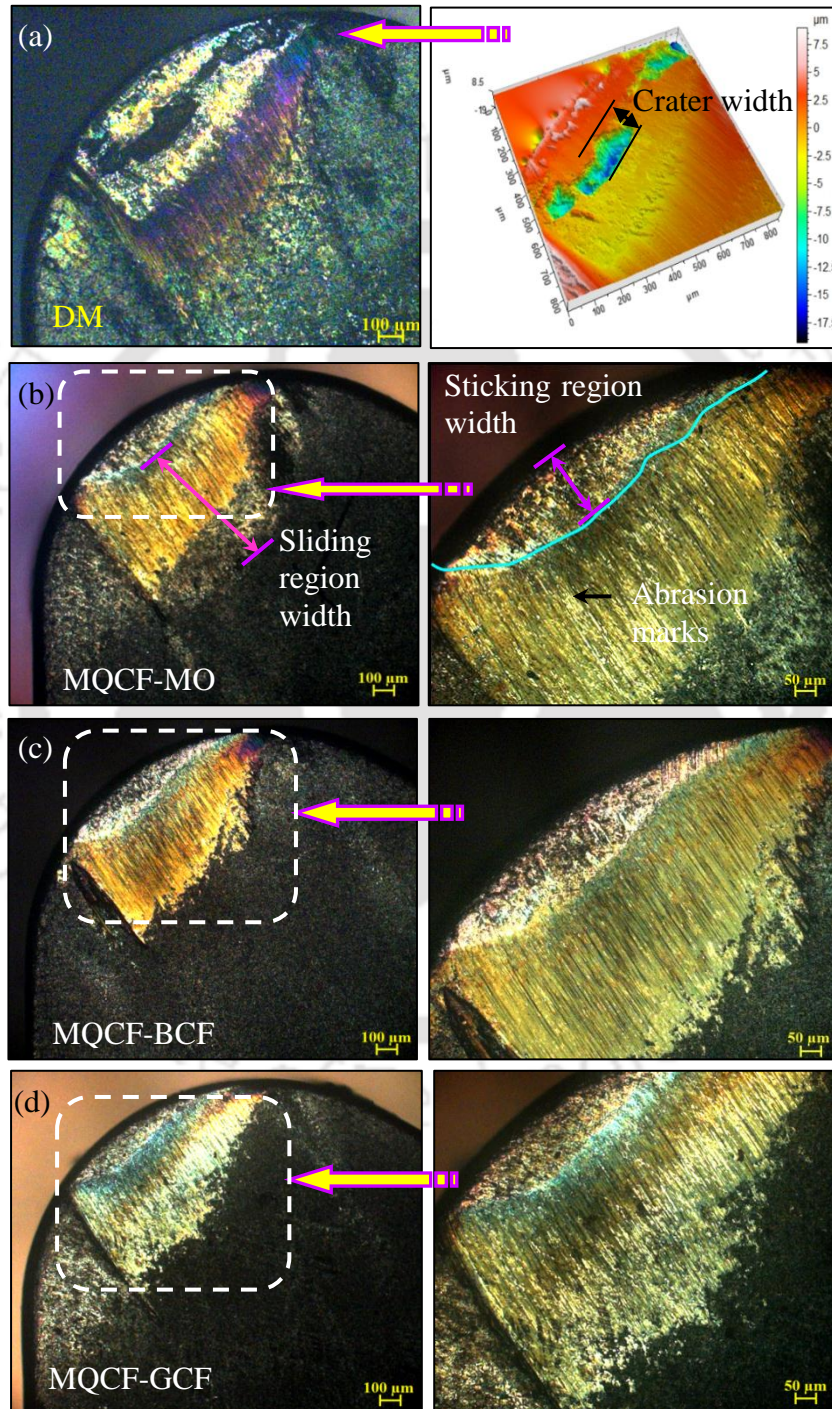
Sticking and sliding regions of the tool-chip interface during (a) dry machining, machining using (b) mineral oil, (c) bio-cutting fluid and (d) green cutting fluid
